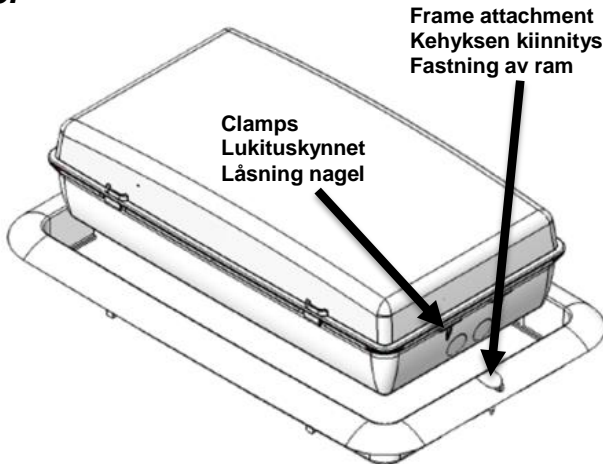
Recessed mounting, mounting hole 350 mm x 215 mm
